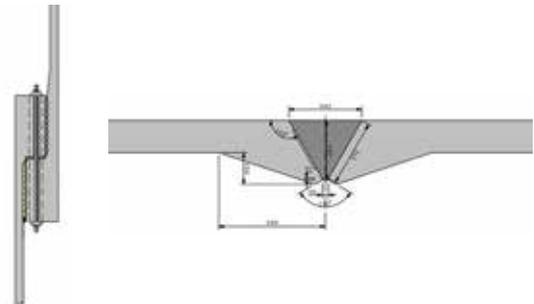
Joints between panels (vertical joint) and sections (horizontal joint)
